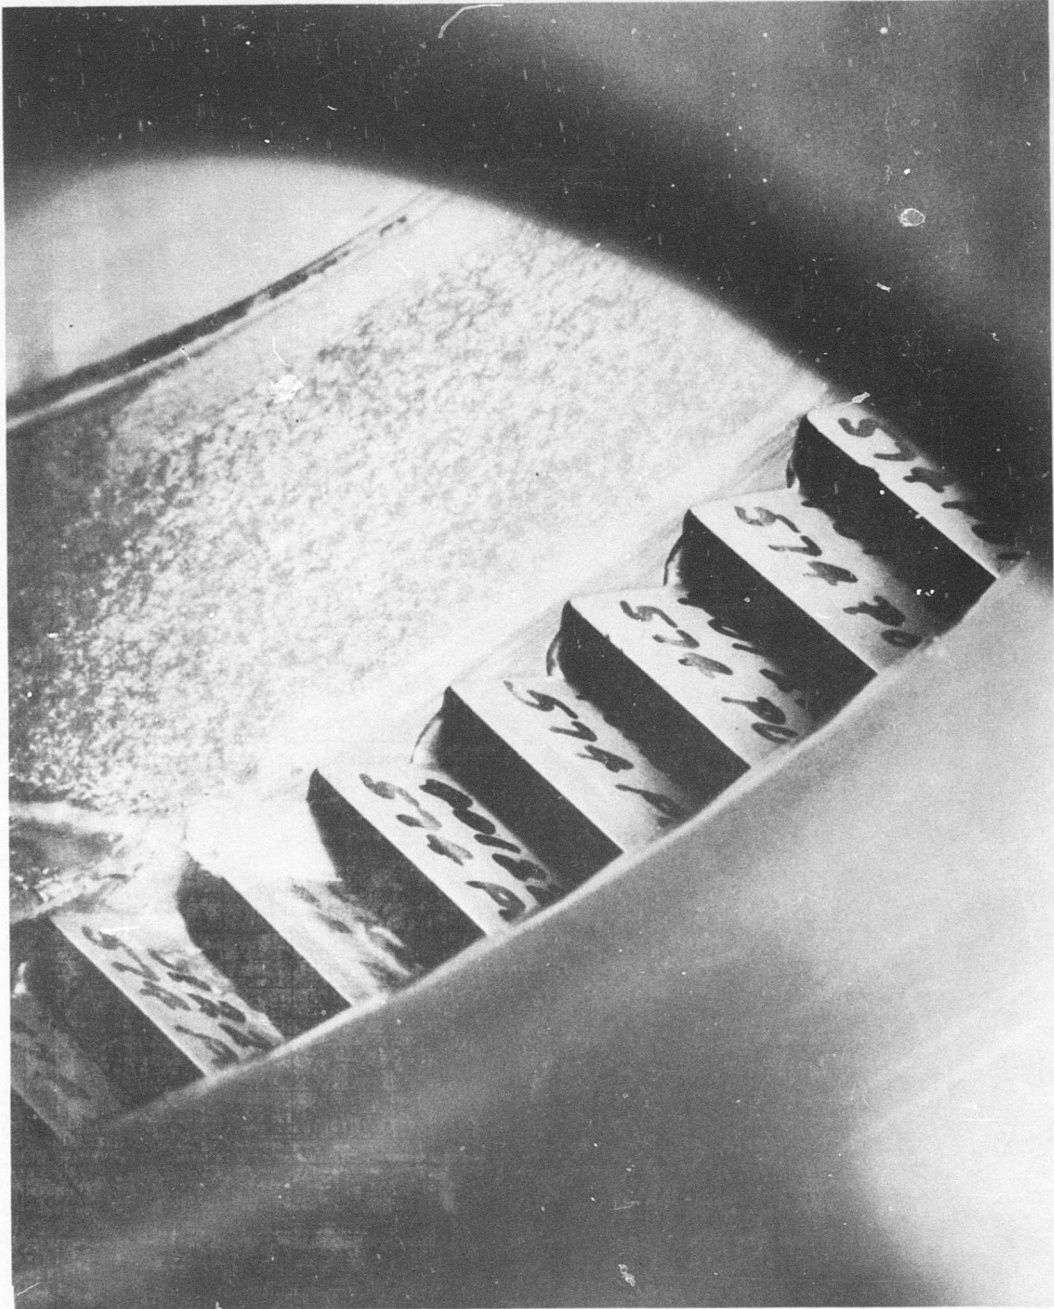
Rotor Blade Leading Edges Showing FOD Encountered During Tests of Buildup A - Sector 1.
